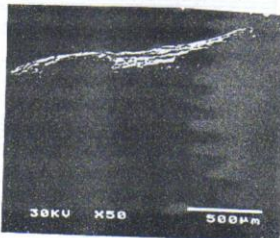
d. Tool nose wear for machining the composite specimen at a cutting speed of 183 m/min, feed of 0.2 mm/rev and depth of cut 0.25 mm using a CBN tool.
